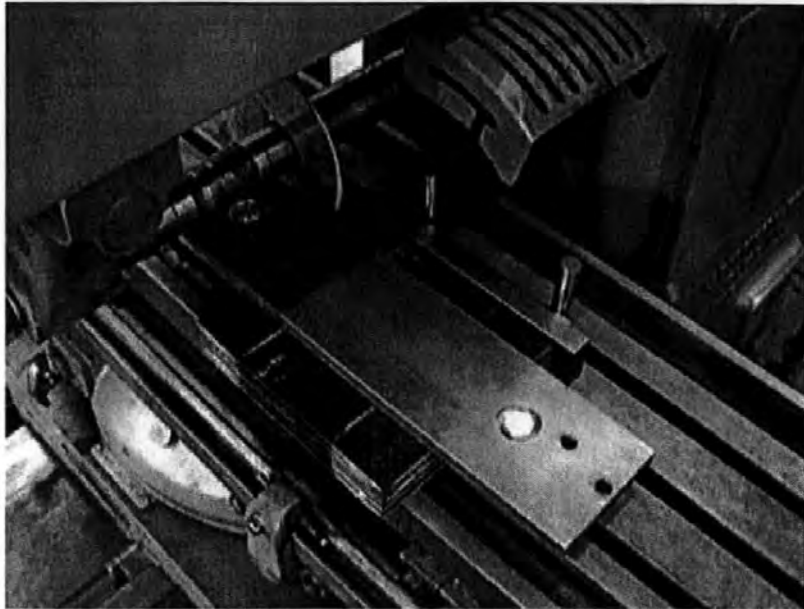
Cutting of tension / compression mechanical test coupons with Universal milling machine
